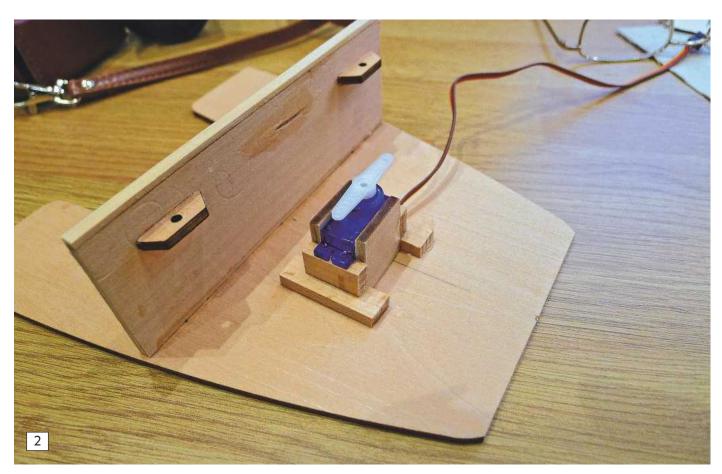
Fastening tabs were glued in place on the rear of the aft bulkhead. Luckily two are supplied and they were drilled with a clearance hole for the 3mm thread of the Allen screws. Note the servo mounting arrangement with its output arm arranged to be accessible from inside the hatch.
